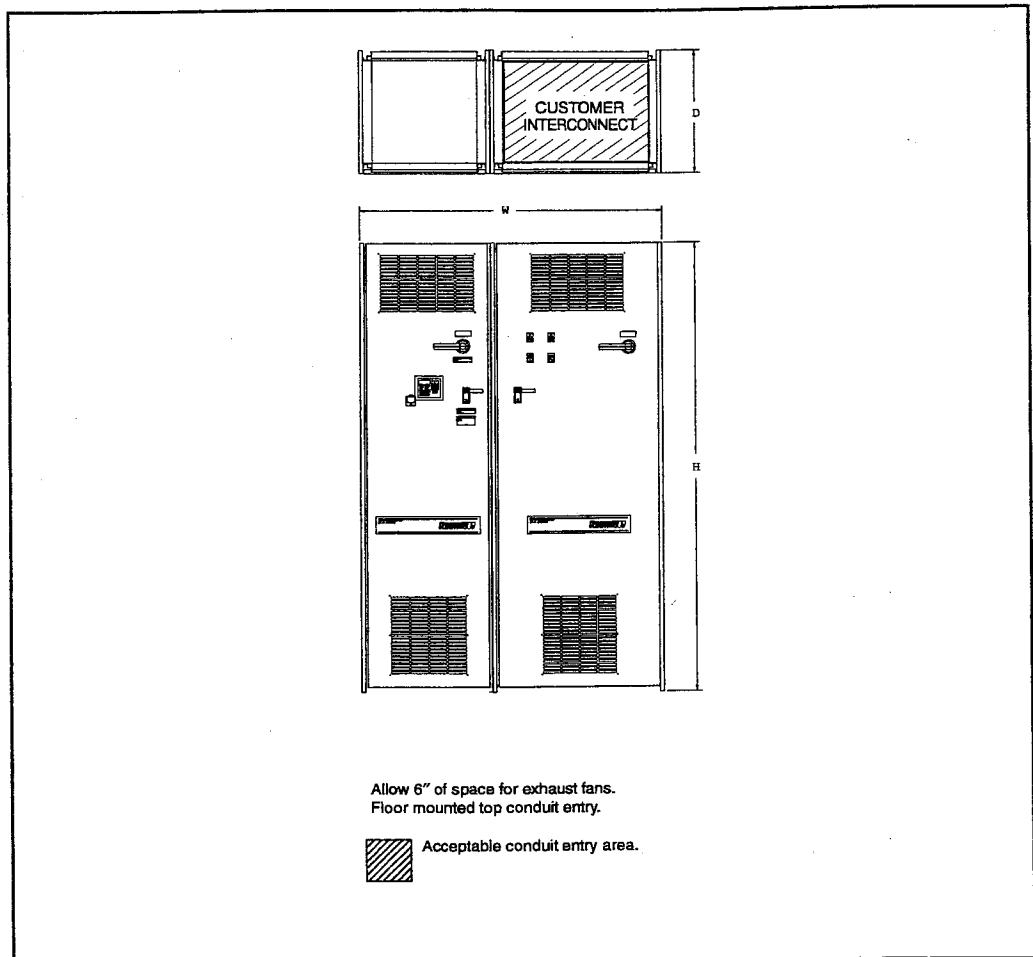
Floor Mount Option Style B+ Drive Dimensions (200-400HP @ 460VAC)
